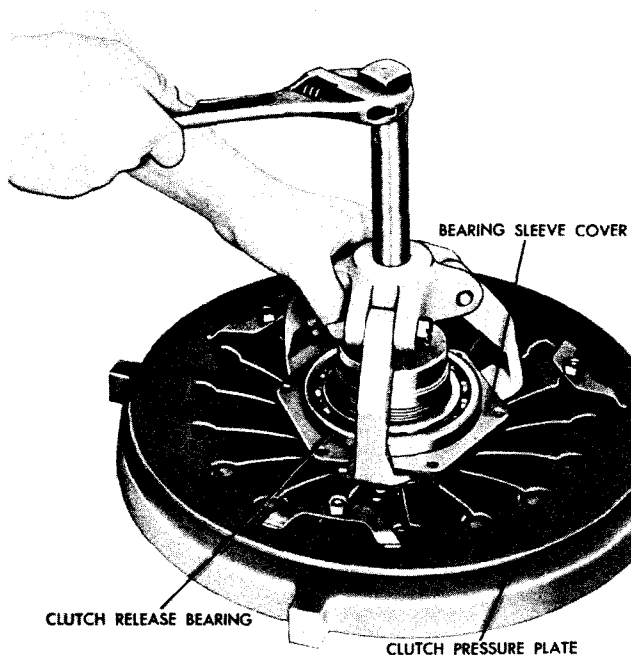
Removing clutch release bearing sleeve cover and clutch release bearing
